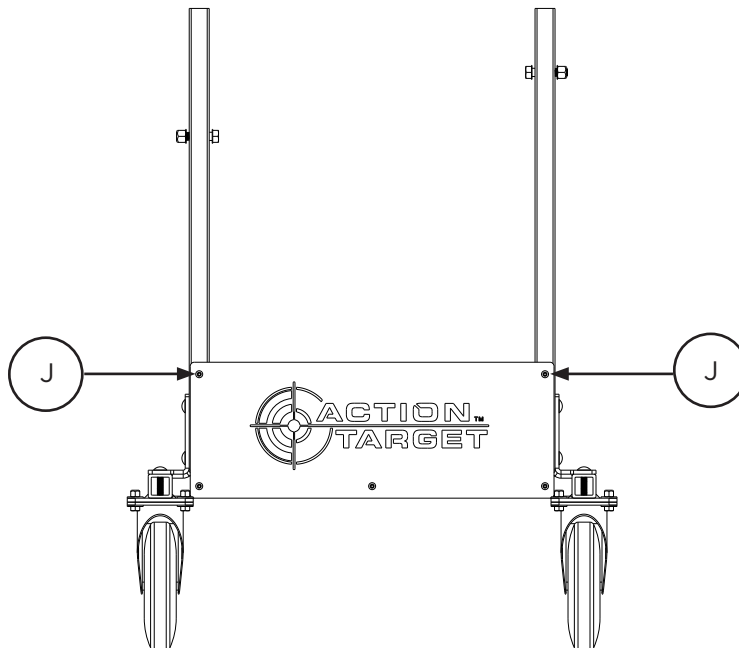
INSTALL BUTTON-HEAD SOCKET CAP SCREWS INTO TRAP STAND UPRIGHTS THROUGH THE CROSS BAR
